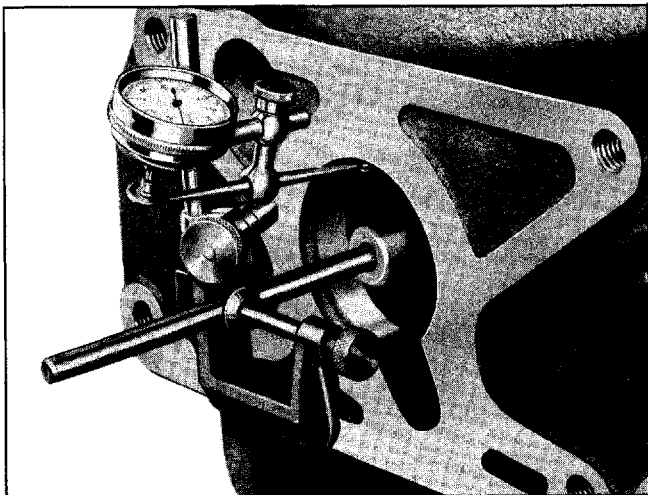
Dial Indicator in Place to Check Housing Hole
